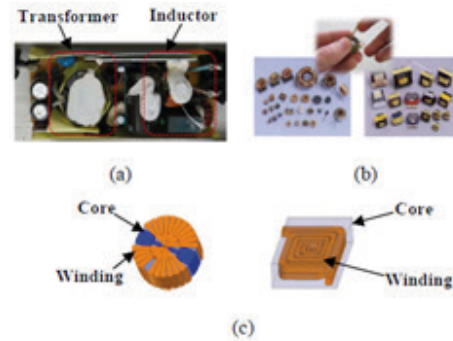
(a) Typical power supply consisting of a number of discrete magnetic components; (b) Basic process for making the windings of inductors and transformers; and (c) Integrated uniform-flux inductor design.
